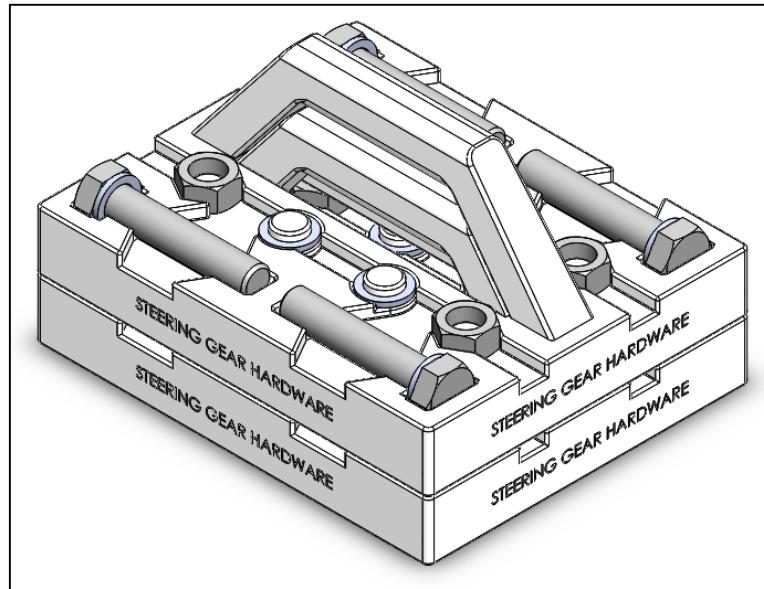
Fully assembled and stacked steering gear hardware fixture [65].
